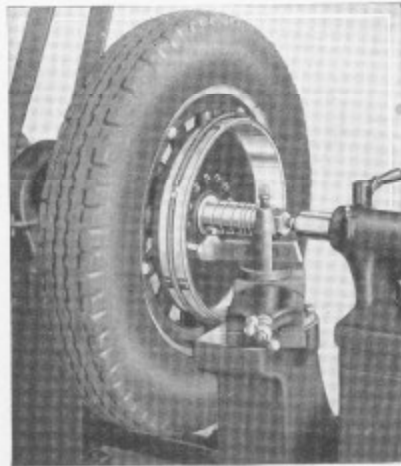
Turning the Brake Drum is Faster and Does a Better Job Than Grinding
